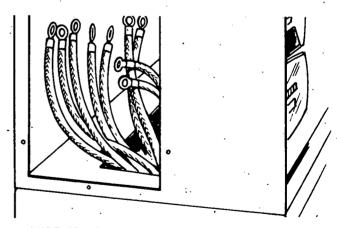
CONTROL BOX (SIDE PANEL REMOVED)
